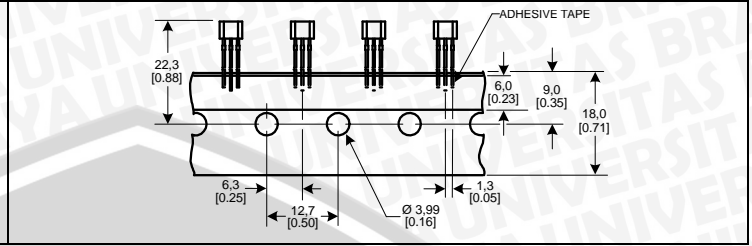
SS59ET Mounting Dimensions (for reference only, mm/[in])
